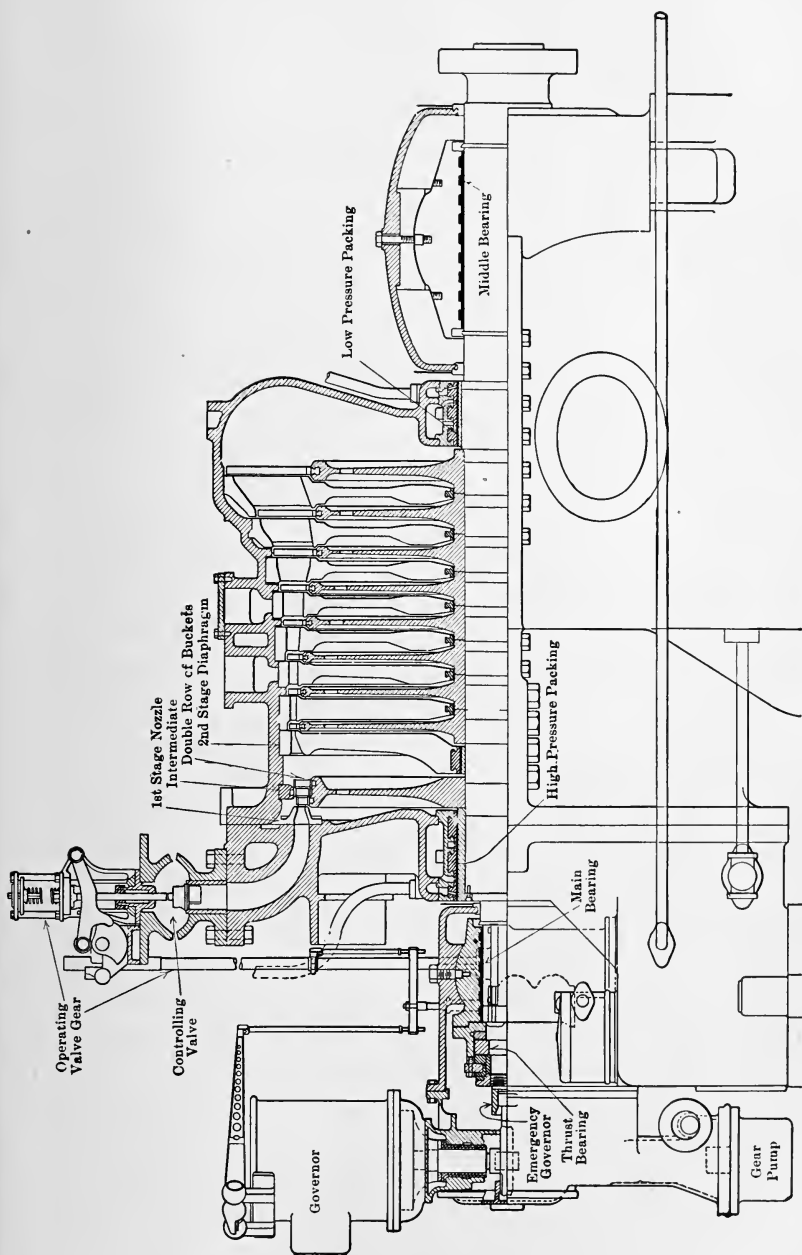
Assembly of 12,500-kw., Single-cylinder Curtis Steam Turbine, 1800 r.p.m., 12,000 volts.
